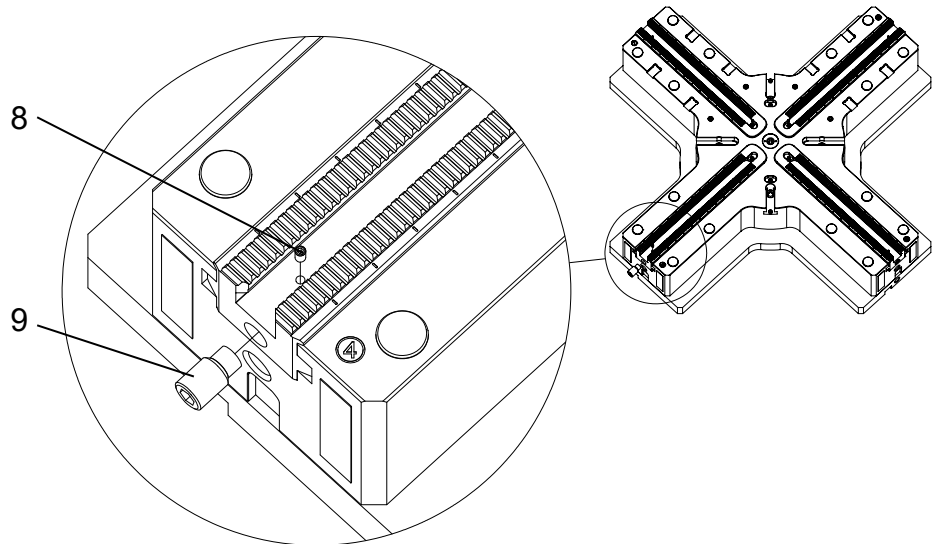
Removing the threaded pins of the InoFlex® VL100
